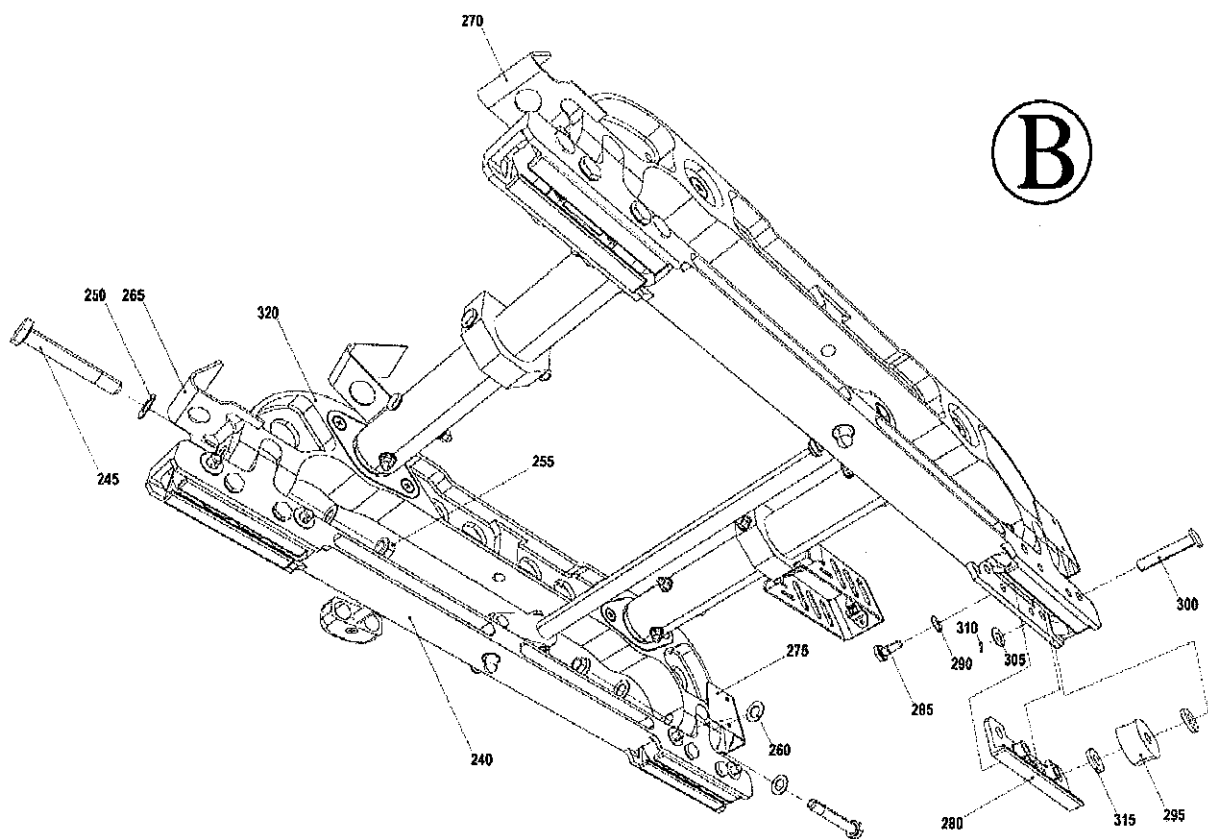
SHEET 3 BASE STRUCTURE ASSEMBLY
